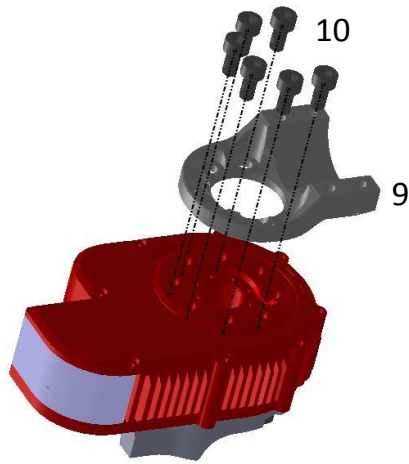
Attaching the Bottom Half of an Output Tube Adapter to the Assembly in Fig. 5
